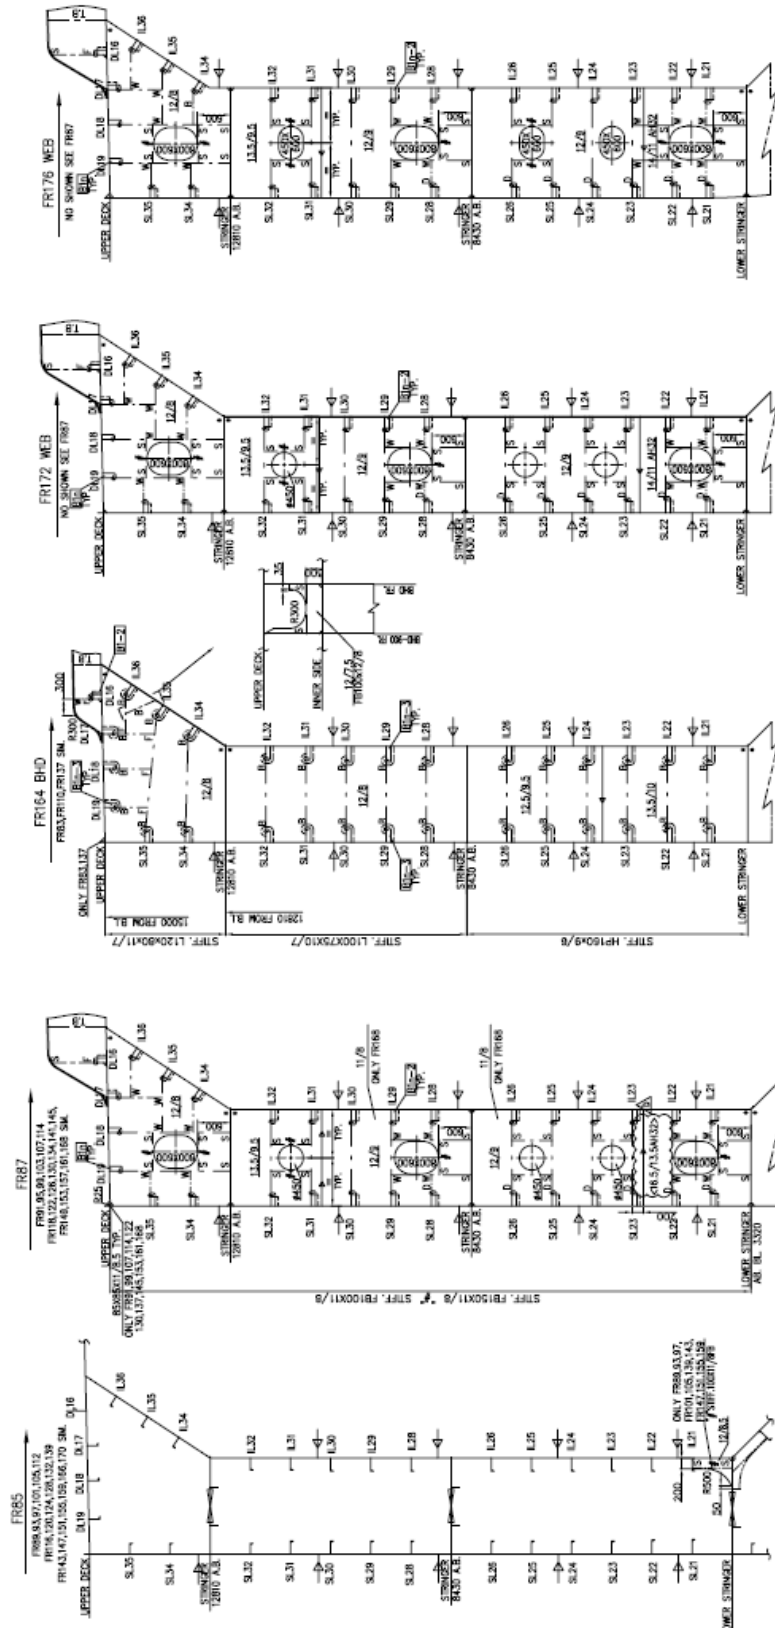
(c) – Double side construction in several frame sections, transverse view
